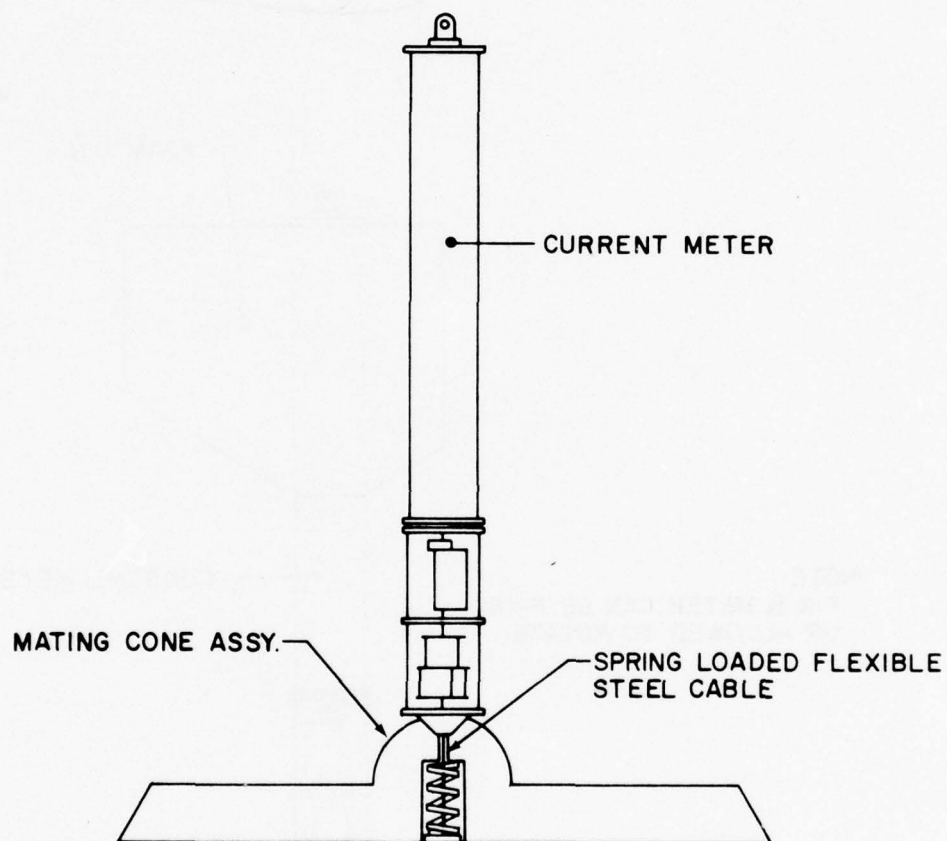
Spring Loaded Flexible Cable (Short Reach Cable)
